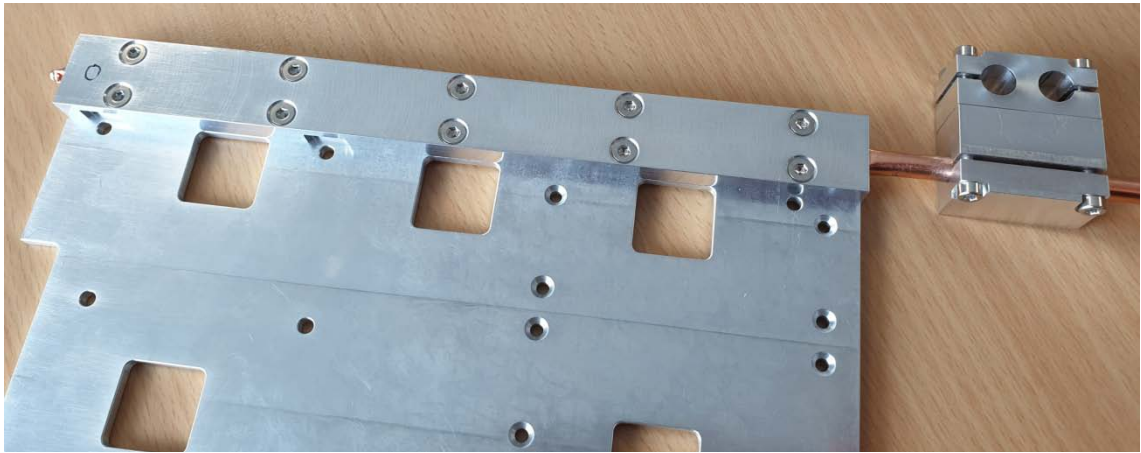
DCB heat spreader with heat spreader clamp, heat pipe and heat pipe clamp
